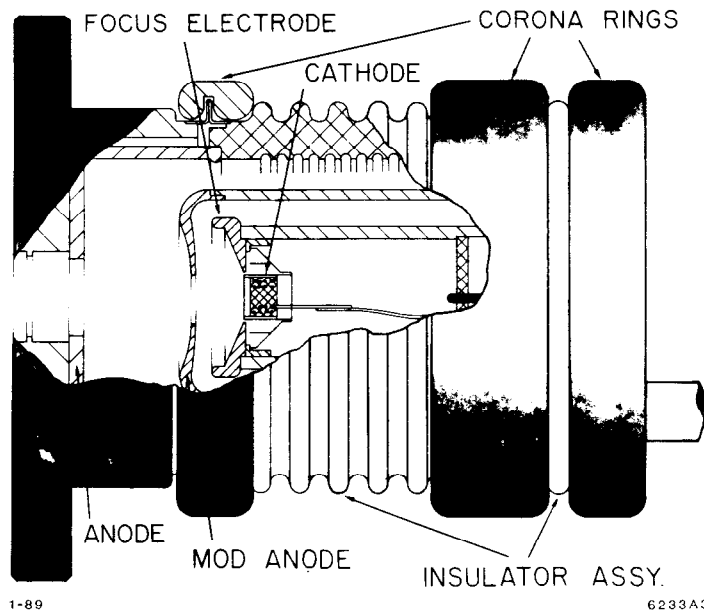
Mechanical configuration of the UCSB FEL gun.
